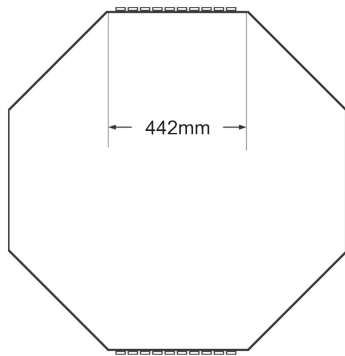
Cross-section view of the boiler body and the TEG placement instance.
